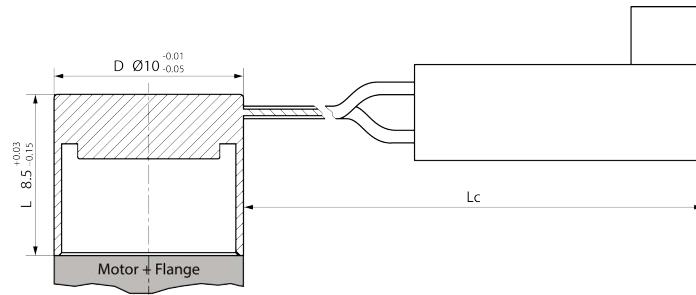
ENX 10 EASY XT – Dimensional Drawing [mm]
